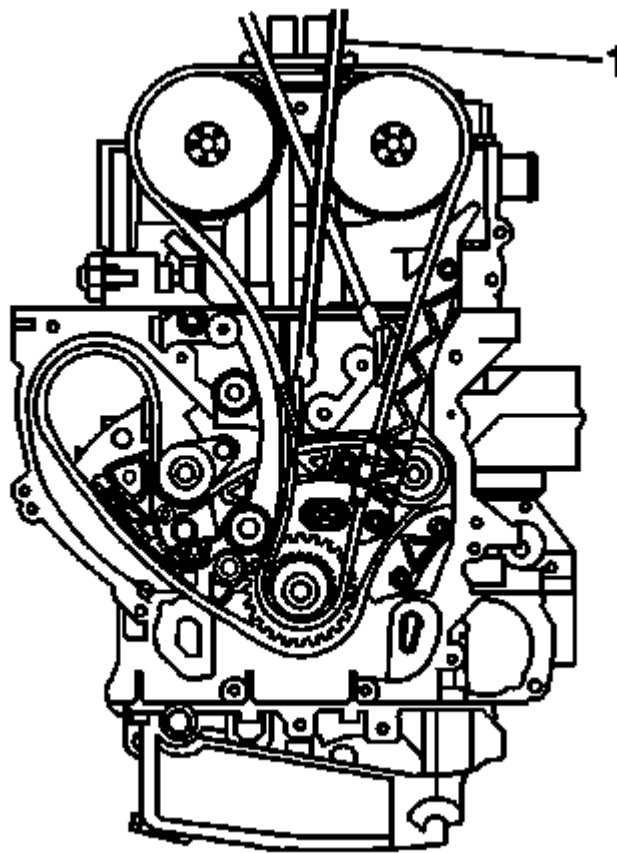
Identifying Timing Chain & Chain Retention Tool
